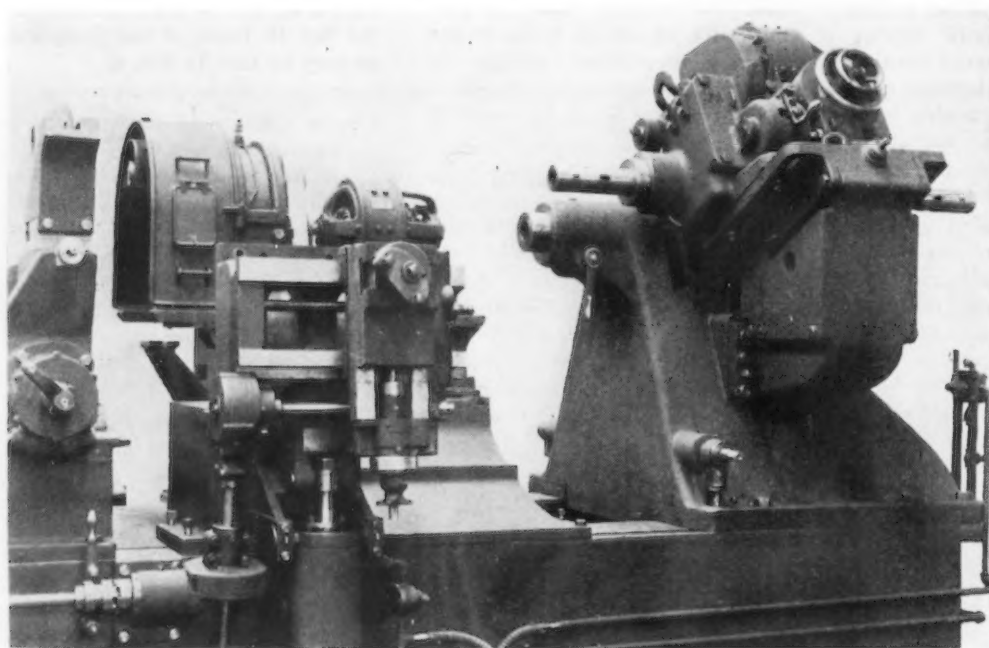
Journal turning lathe with quartering attachment mounted on 30-deg. filler block for "quartering" operation at 120 deg. on three-cylinder locomotive wheel sets.
